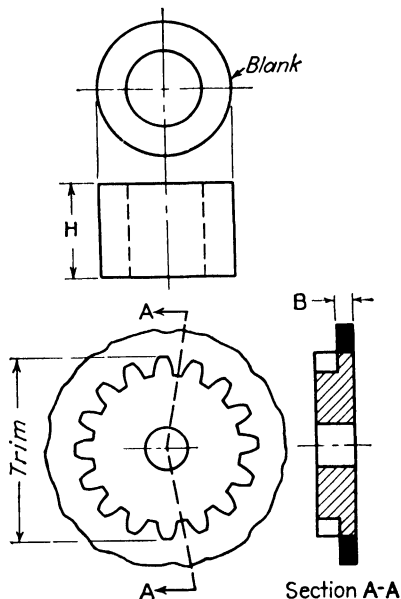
Small parts that must resist wear, such as this business-machine gear with the integral flange behind the teeth, are swaged by the overflow process in one press stroke and the irregular edge of flange is subsequently trimmed off in another die.
